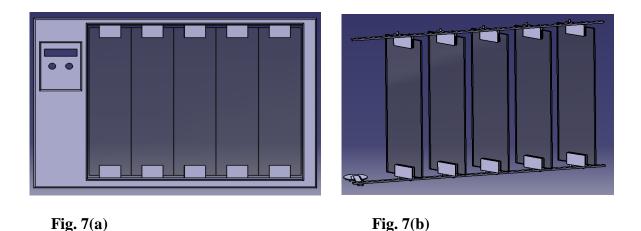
(a) 3D assembly of the device, shown in front view. (b) The assembly shown in fig. 8b displays the moving parts of the device, which allow for the panels to open or close
